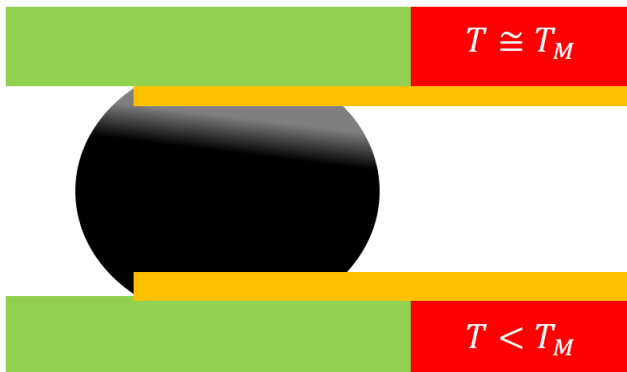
Directional melting of a SMT solder joint due to heat from the THT soldering (represented by yellow arrows). Tensile stress due to component warpage (represented by red arrows).
